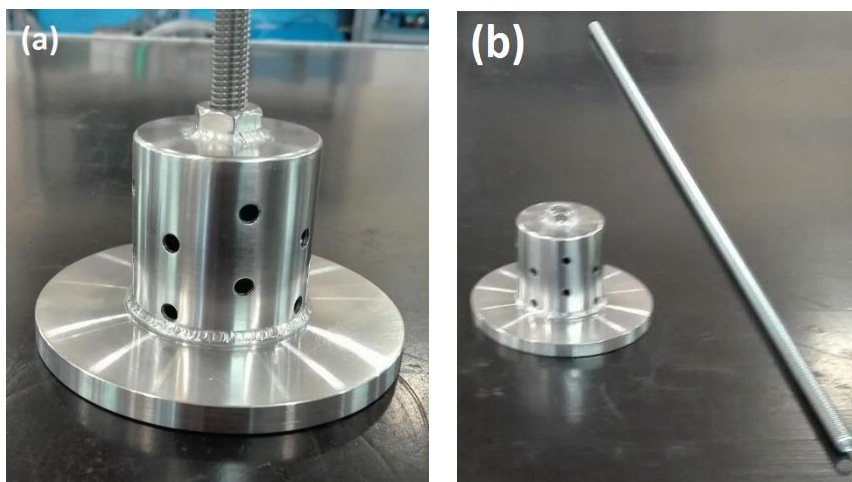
(a) SS316 confinement disc screwed into the SS316 threaded rod; (b) SS316 confine disc and full-length SS316 threaded rod.
